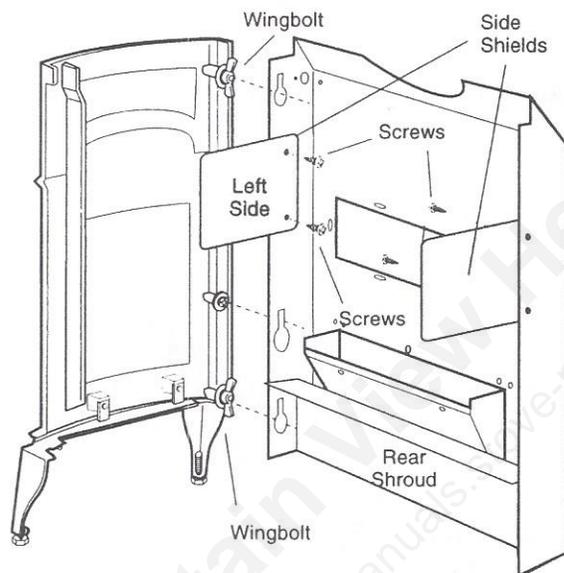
Fasten the side shields to the rear shroud, and the left end to the rear shroud.
